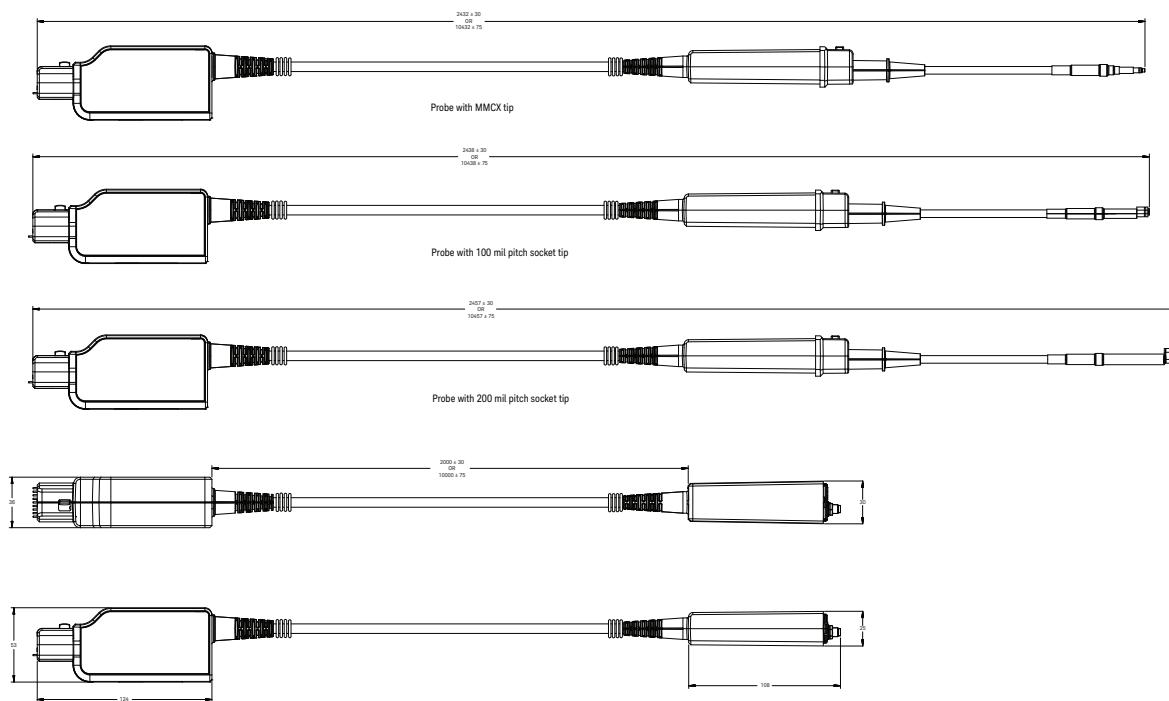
PS0004A/6A/7A/8A Probe Dimensions
